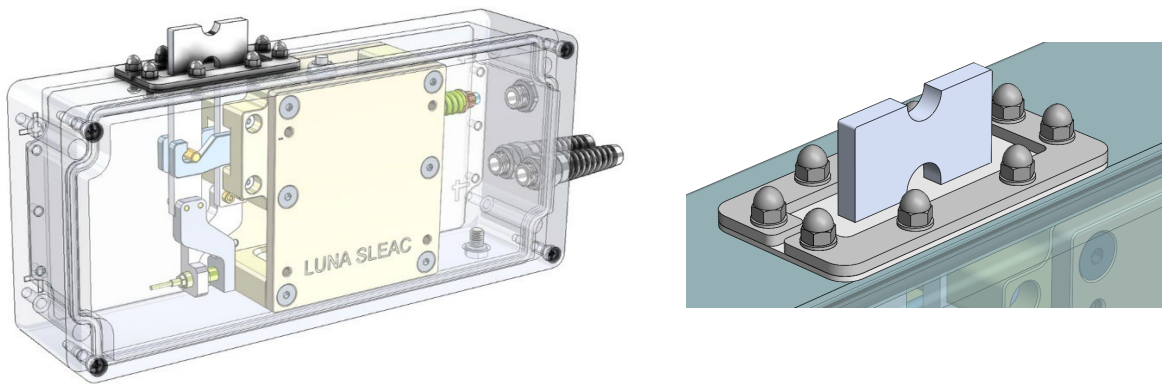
SLEAC load frame enclosure (left) and DCB sample gasket (right).
